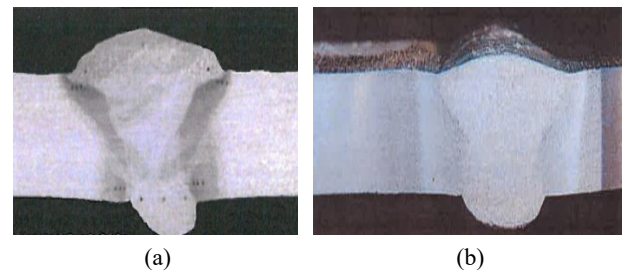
Macrostructure of weld cross-section (a) FCAW, (b) GTAW
